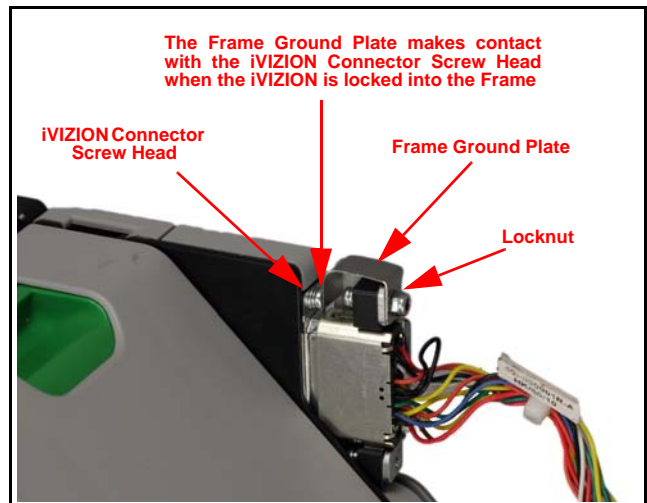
Plate/Harness Assembly (iVIZION Locked into Frame)
